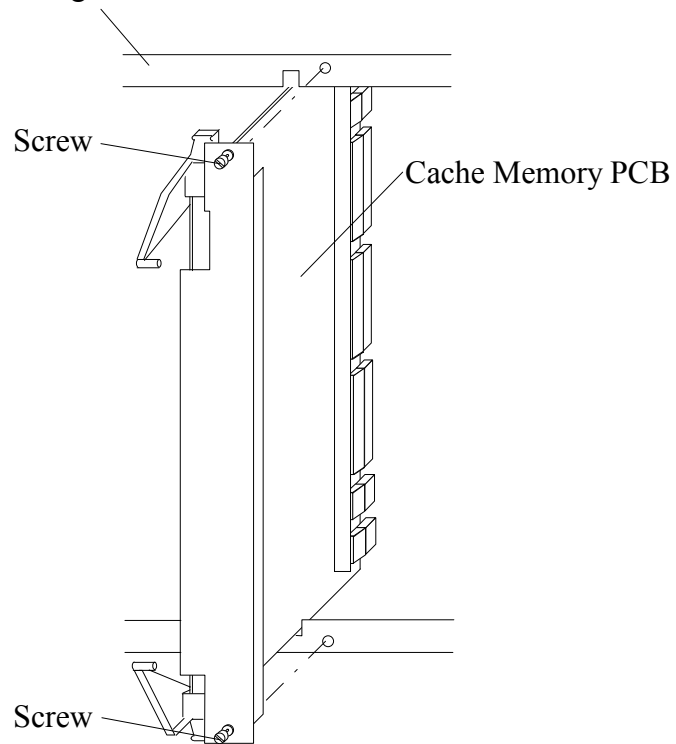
Removal of the Cache Memory PCB
